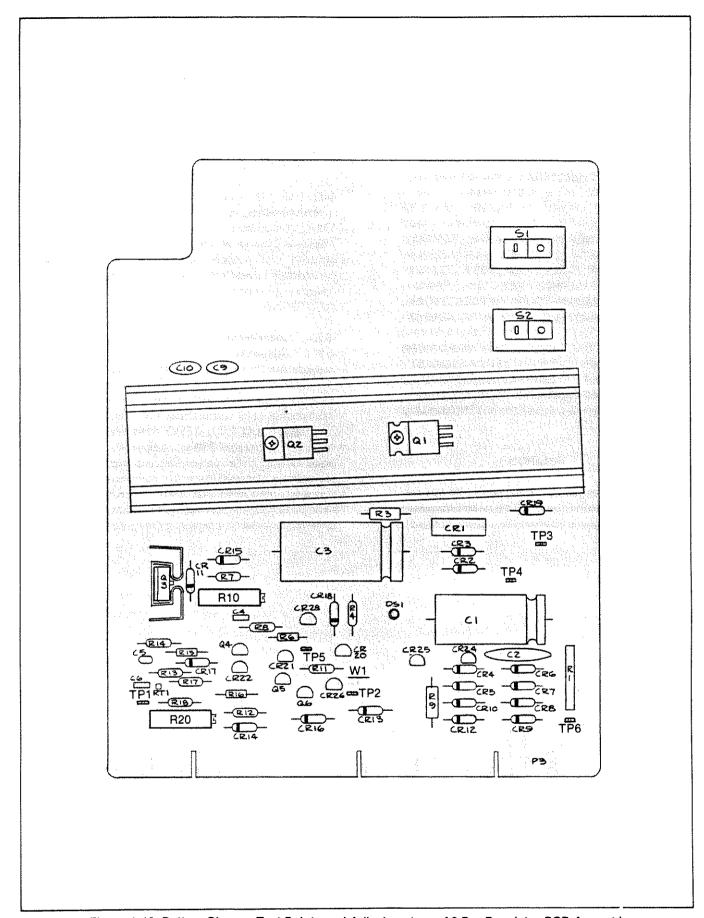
Battery Charger Test Points and Adjustments on A3 Pre-Regulator PCB Assembly
